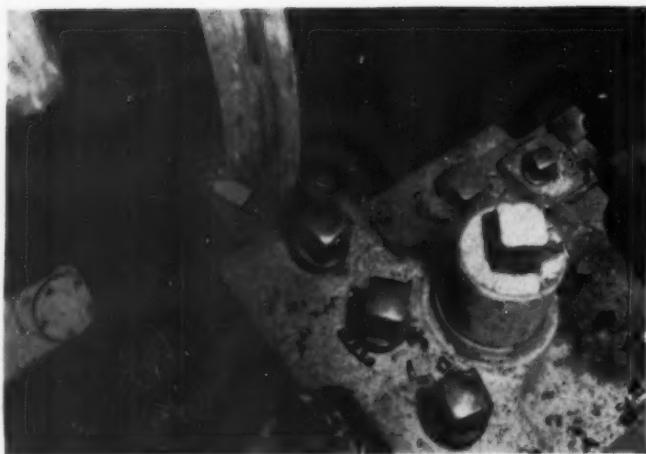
Closeup view of tool holder, tool and workpiece. The use of carbide tipped tools permits the use of turning speeds up to 24 r.p.m. as compared with a previously used maximum speed of 2 r.p.m.
